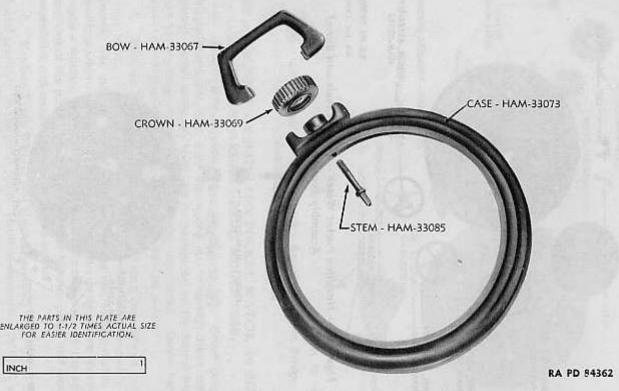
Hamilton Pocket Watch — Case With Bow, Crown, and Stem Removed
